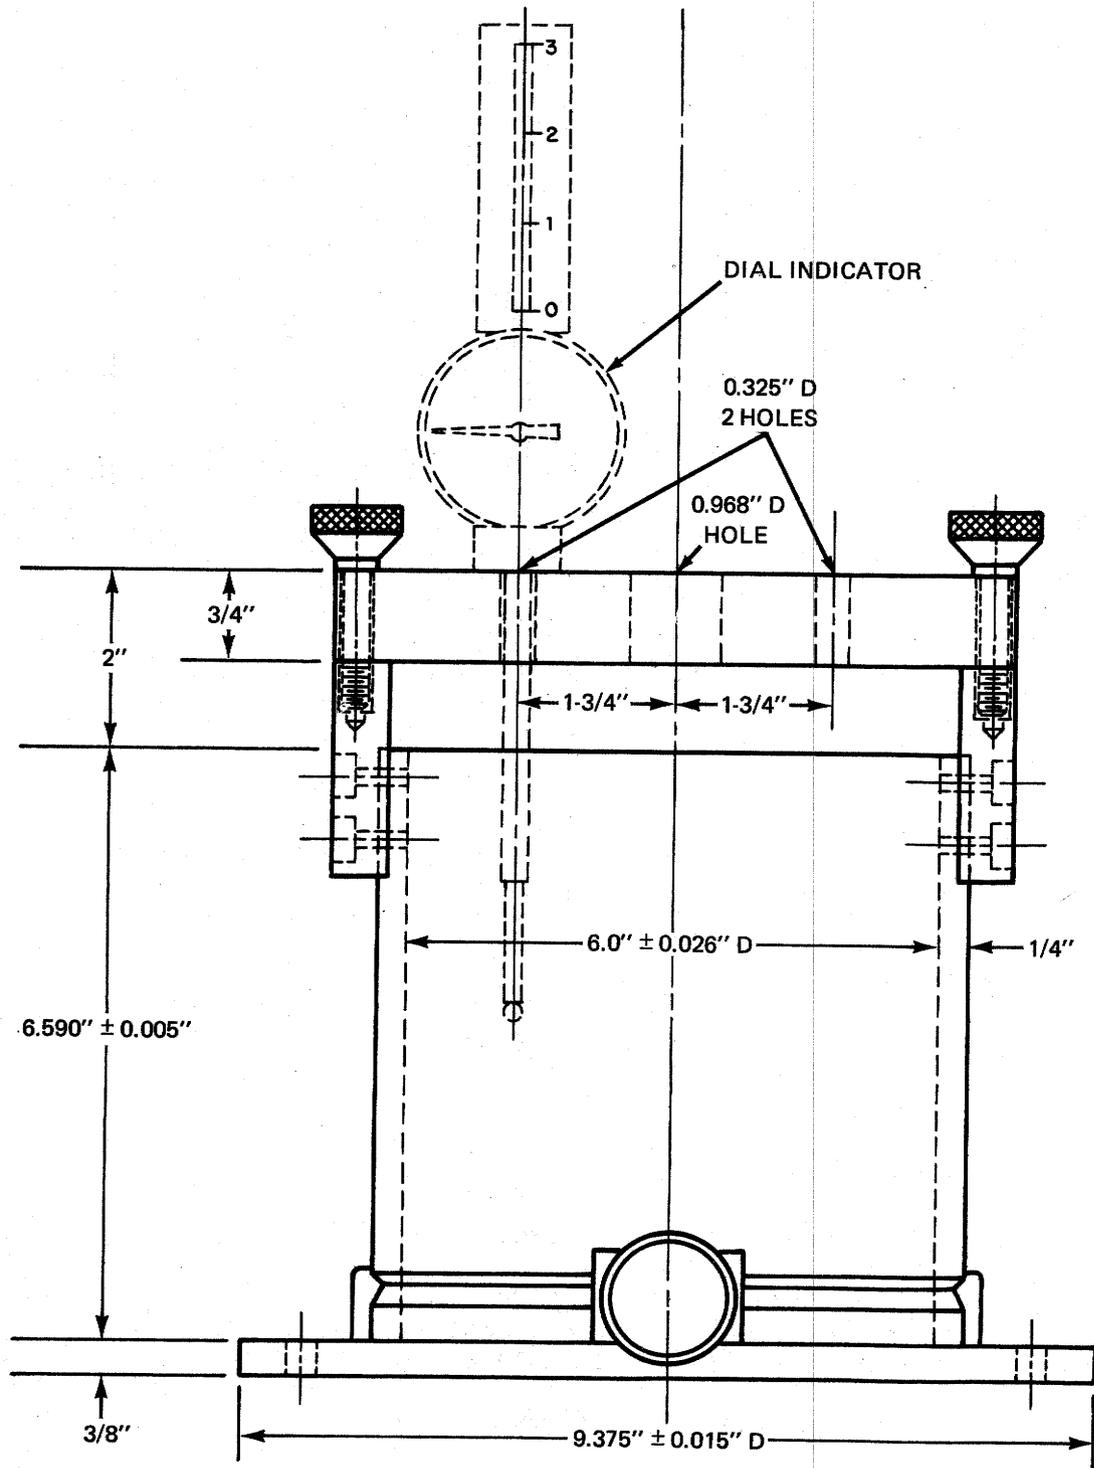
Cylindrical Mold for Testing Granular Materials (from Reference 11)
